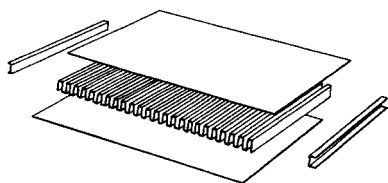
Exploded view of a typical plate-fin arrangement. (Trane Co.)
